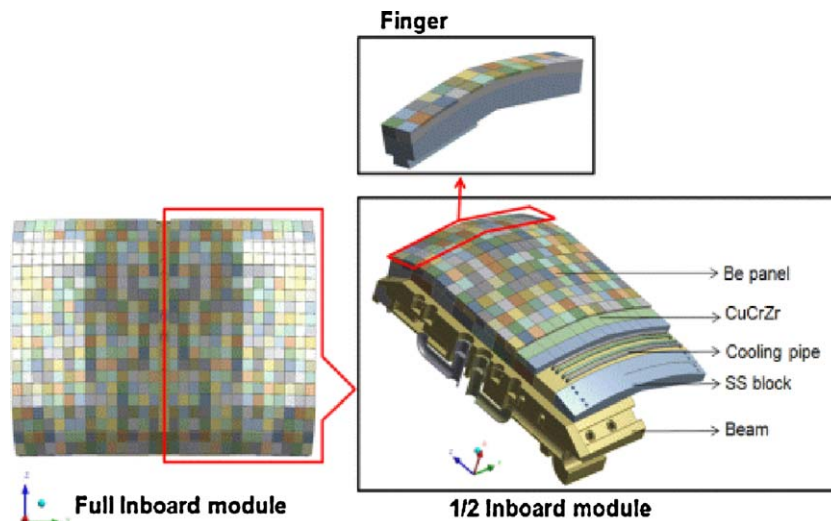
A unit finger and a first wall module for a typical finger-typed blanket first wall.
